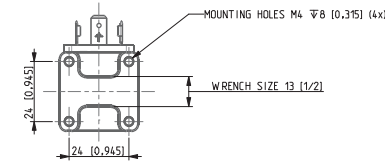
Dimensions 1/8" Inline, Coil Width 32mm
